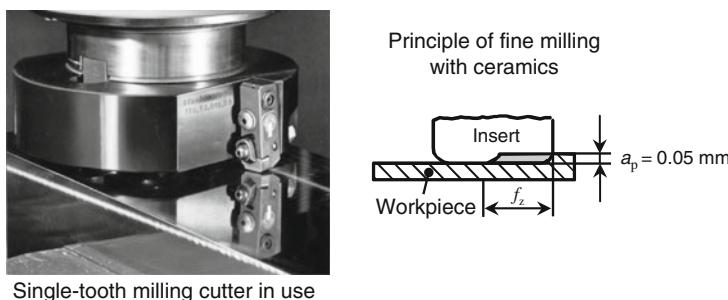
Wide finish milling (fine milling) with ceramics (Source: Feldmühle)
